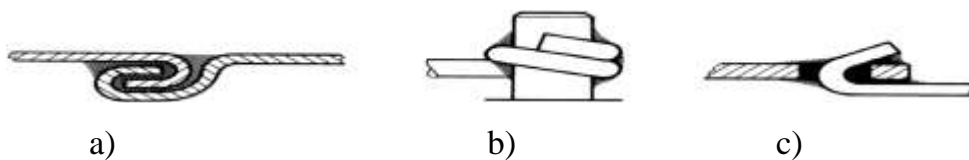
Soldering-joint design (a) interlocking (b) winding round a pillar (c) bending through a tab connector
